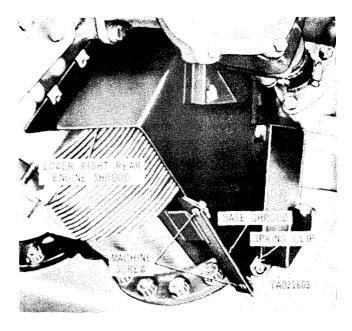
Removing or installing lower right engine shroud and base shroud.
